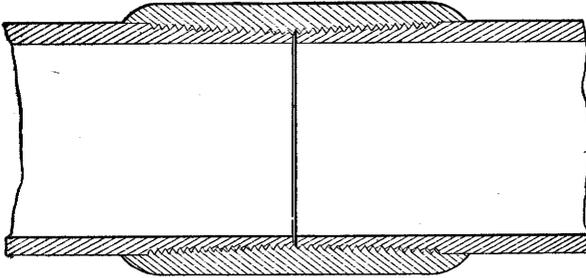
Pipe joint made with hydraulic coupling. This joint will stand hard driving.
